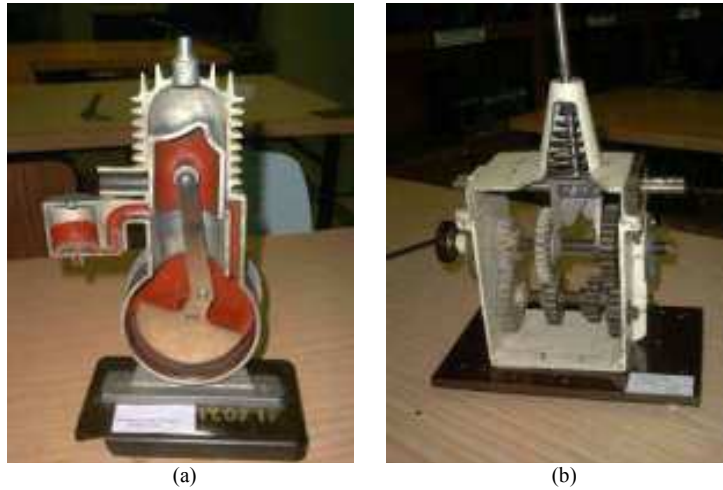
(a) the mechanism of a Lenoir engine (two-stroke engine); (b) the mechanism of a classic gearshift (manual)
